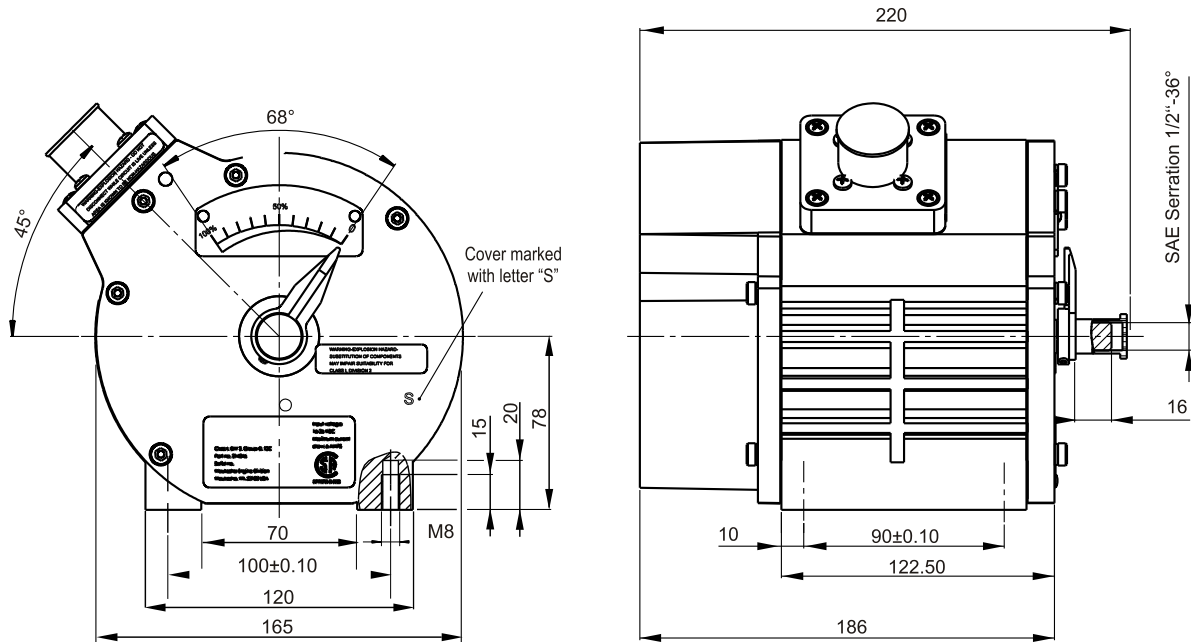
Dimensional drawing StG 2080.XX-SV-PD
